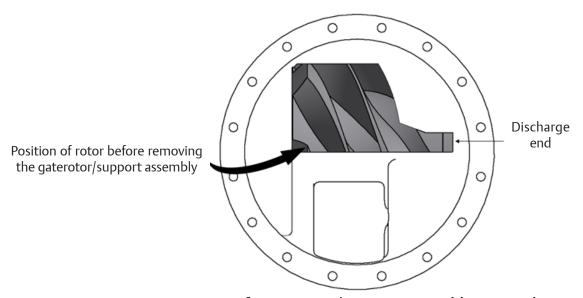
Rotor Position for Gaterotor/Support Assembly Removal
